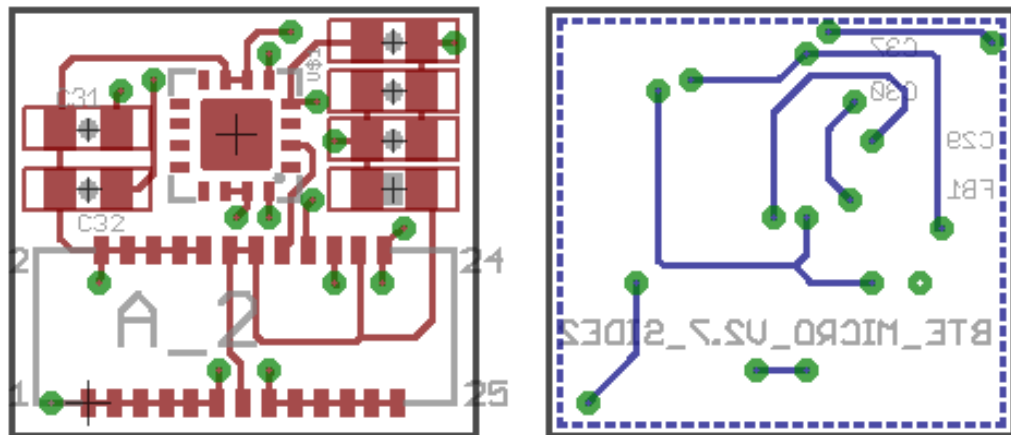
BTE\_MICRO\_V2.7 Right Side board Top (red) and bottom (blue) copper
